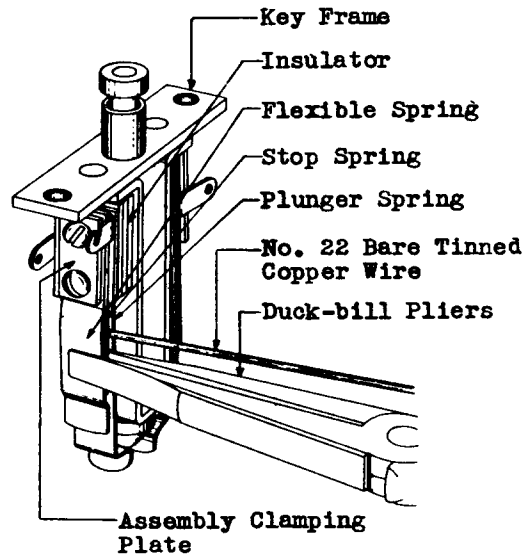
Method of Adjusting for Flexible Contact Spring Position
